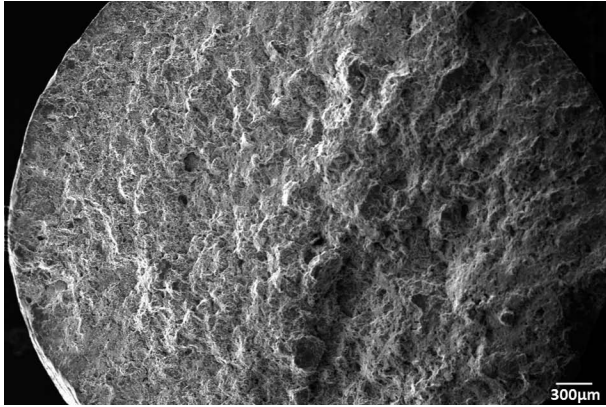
Fracture surface of a room temperature tensile-tested AA 5083 specimen taken at low magnification
